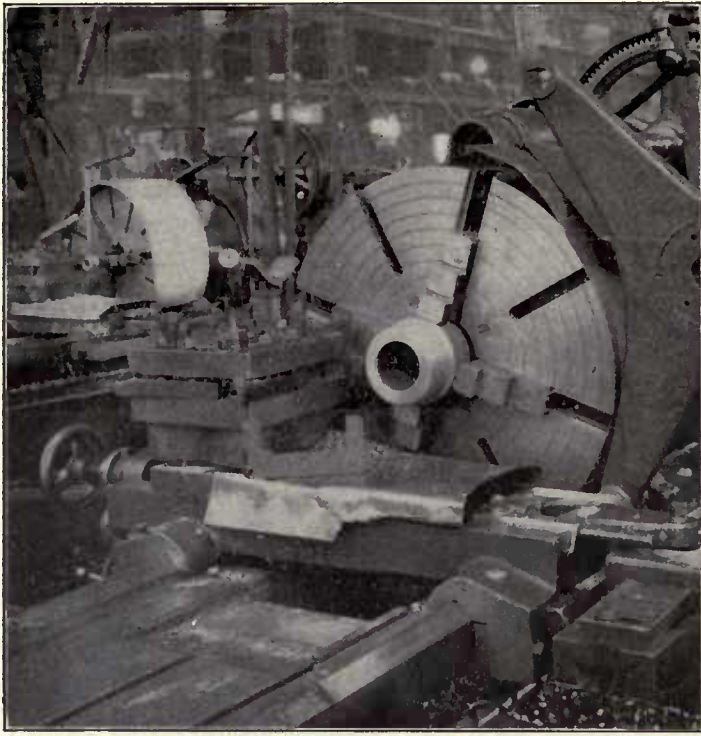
First Turret Lathe Operation in Finishing Two Part Piston Rod Vibrating Cups.
